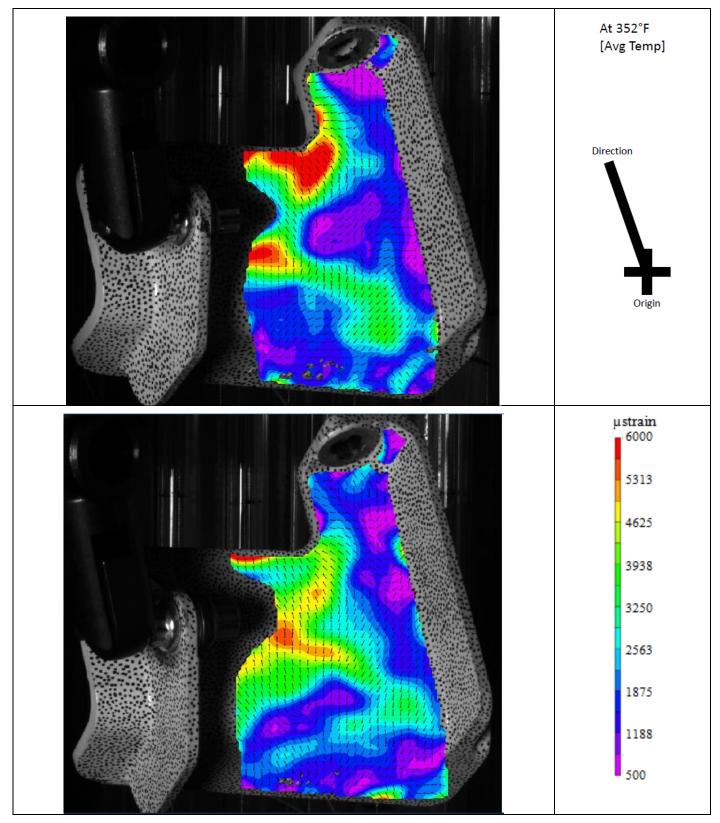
Maximum principal strains caused by heating for two parts from the same moulding batch
